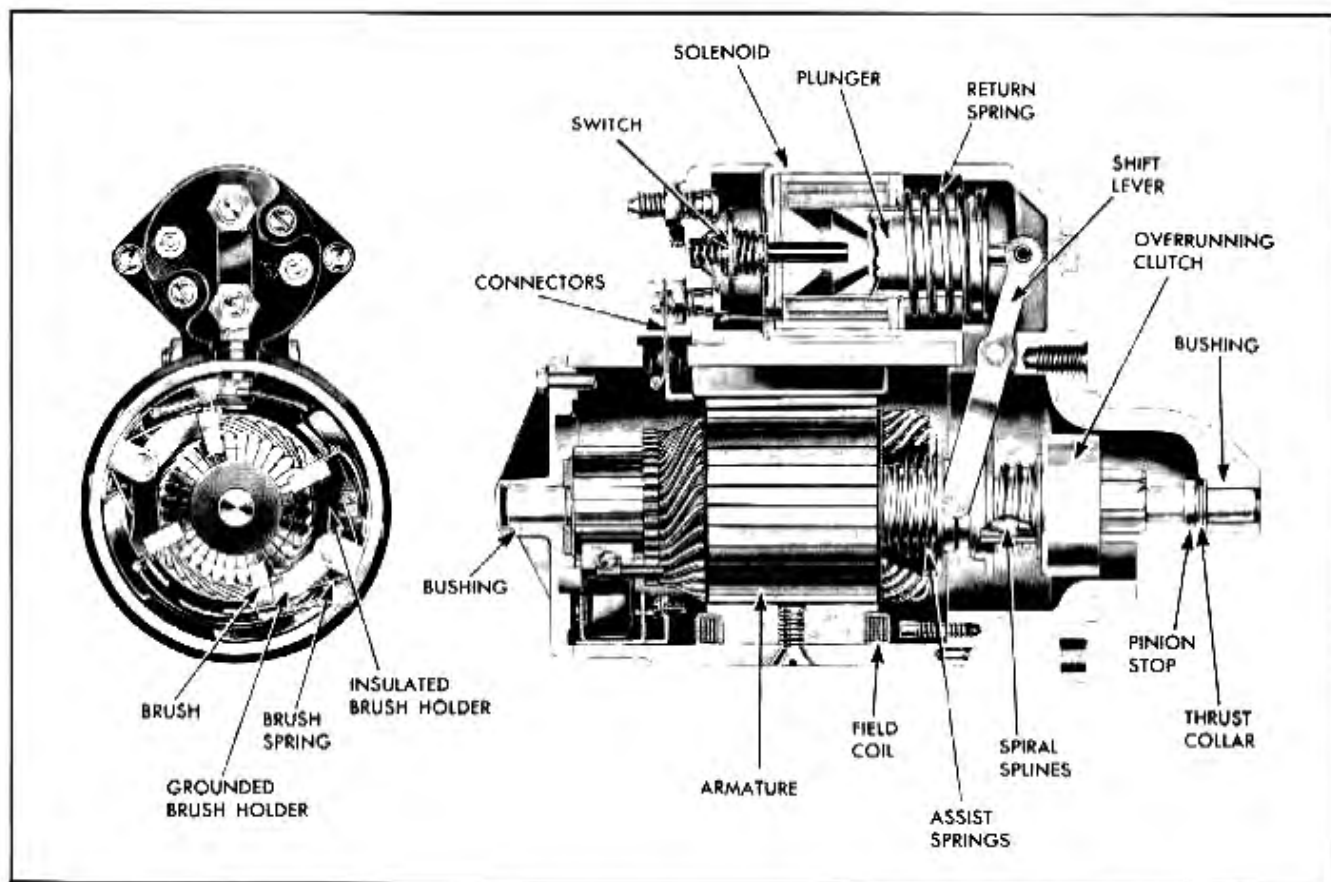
Starting Motor and Solenoid Assembly—Cross Section
